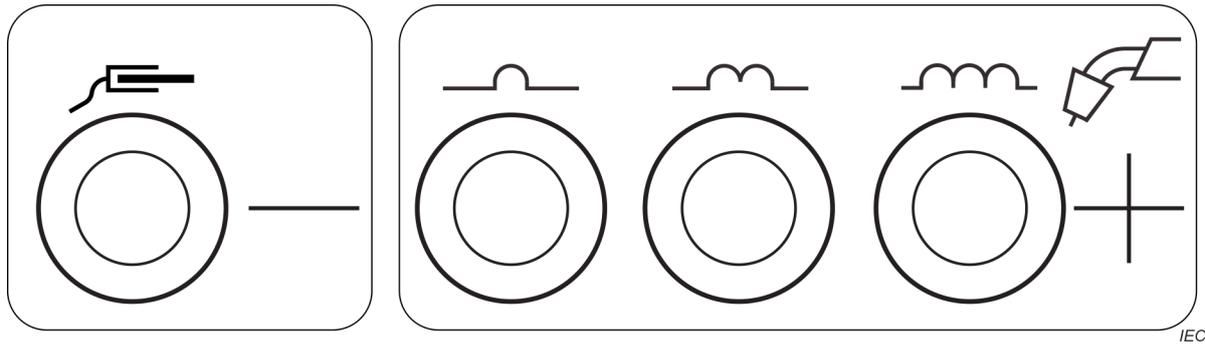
Terminals with inductance selector for MIG/MAG welding
